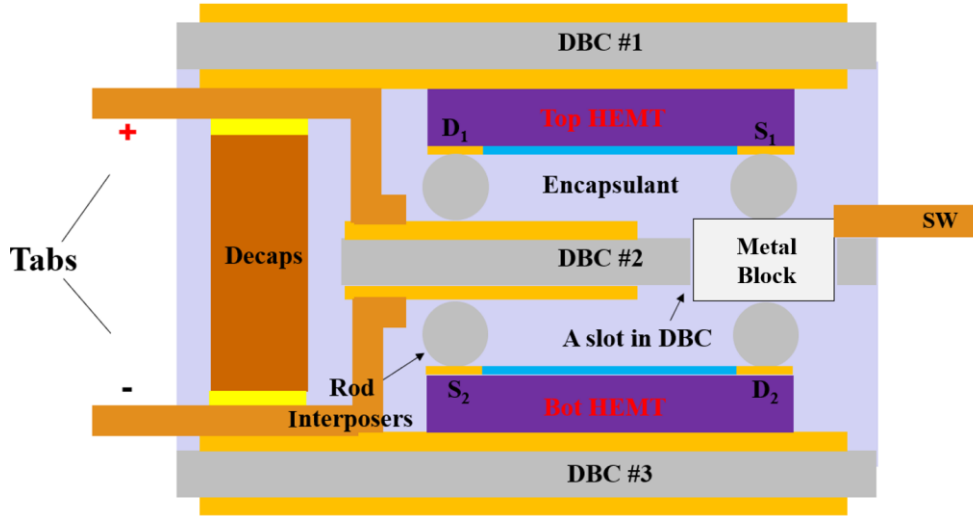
Cross-sectional view of the double-sided cooling half-bridge module in Fig. 2-30.
